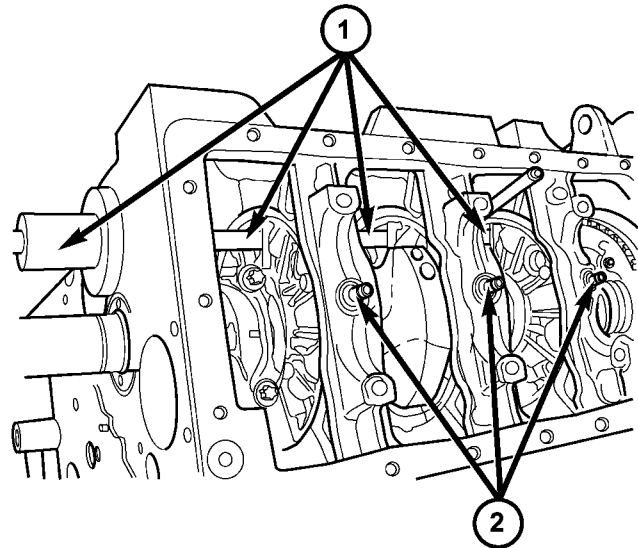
CRANKSHAFT SUPPORT ALIGNMENT
